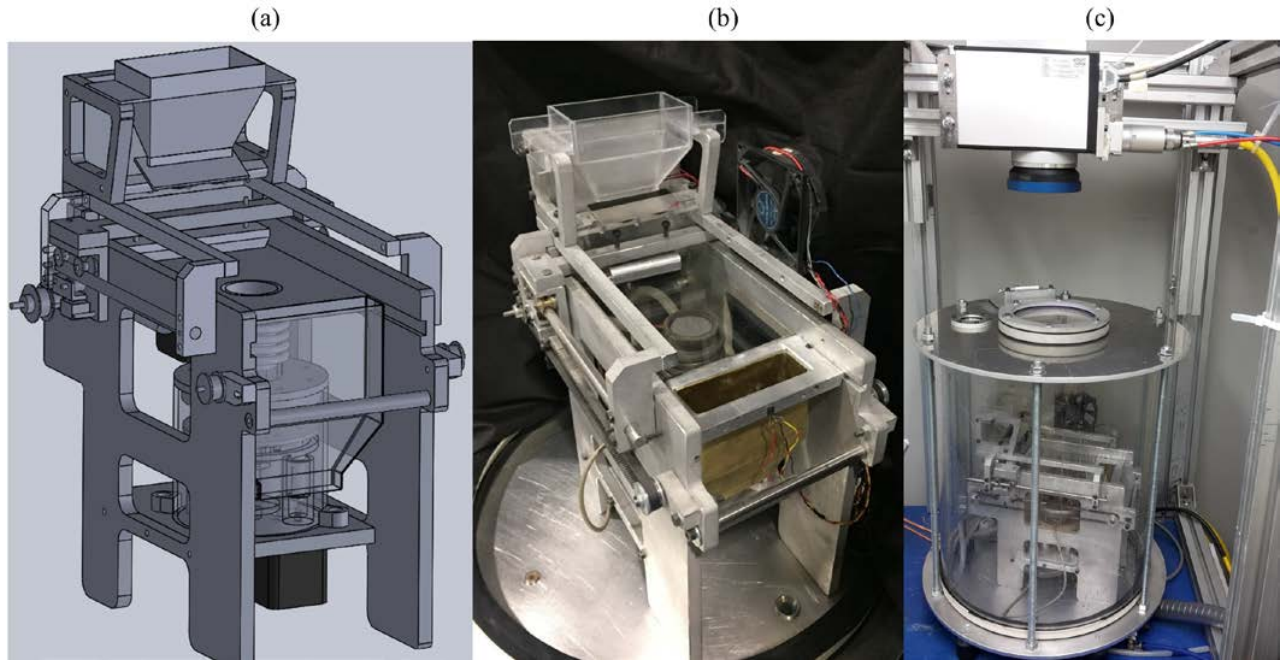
Project Grisù (a) CAD design (b) assembled prototype system (c) final set-up
